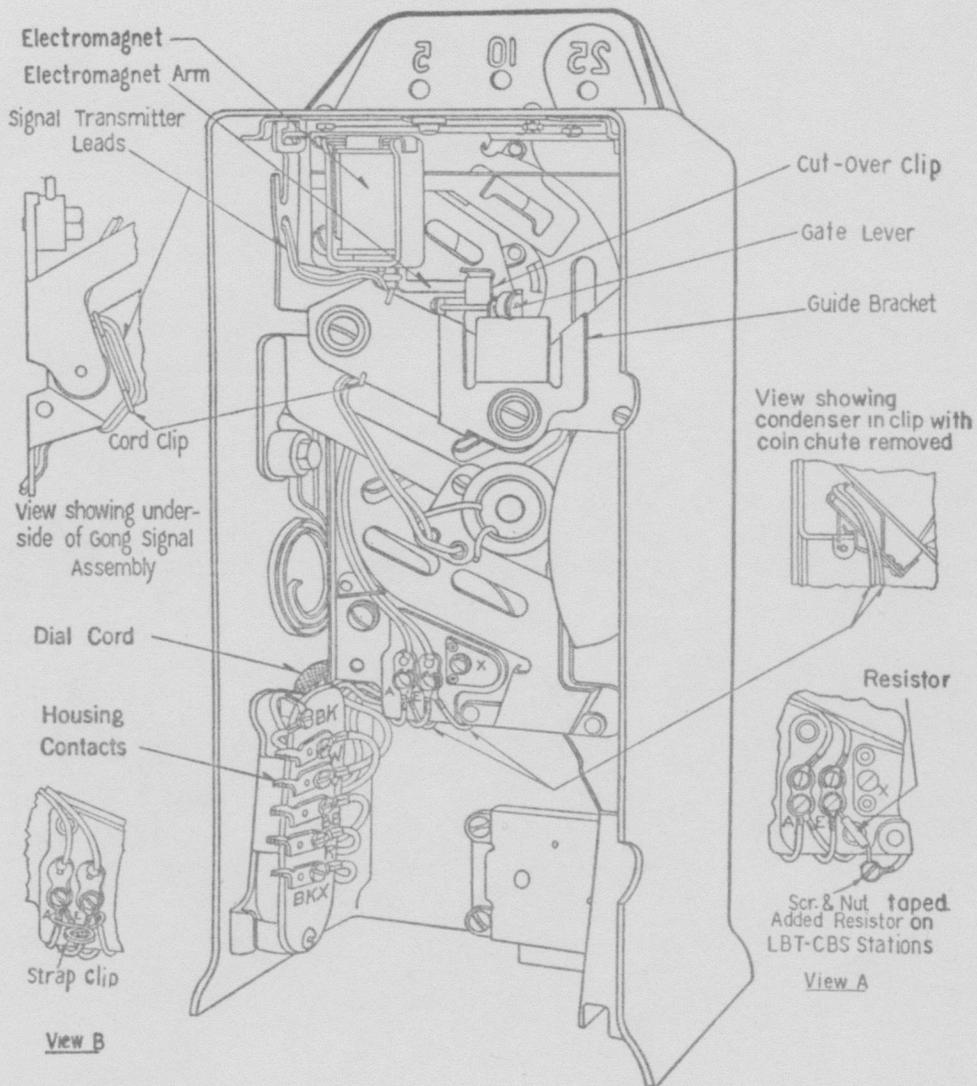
191, 195, 196, or 197-type, D-179432 or D-179433 Coin Collector—Upper Housing Having Swing-type Signal Assembly with One Signal Transmitter
